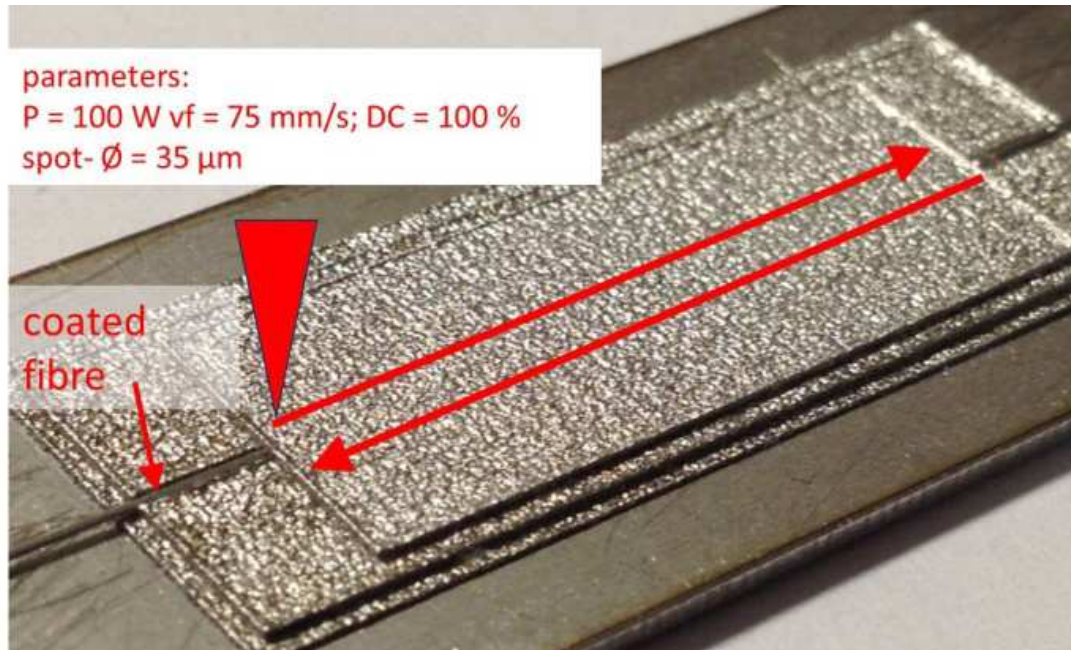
Schematic illustration for applying deep-penetration weld seams to improve bonding between coated fibre and side-wall of U-grooves.
